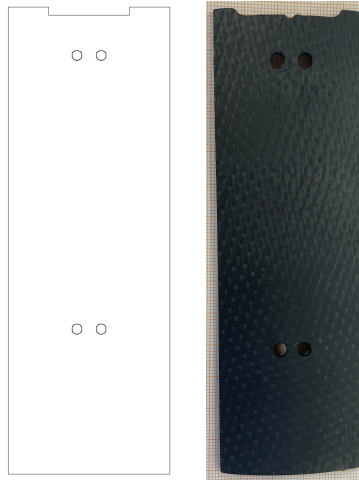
CAD Drawing (left) and as constructed (right) drag flap
